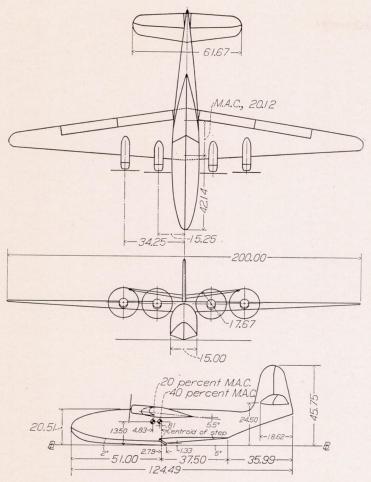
General arrangement of Langley tank model 180. (All dimensions are in inches.)
